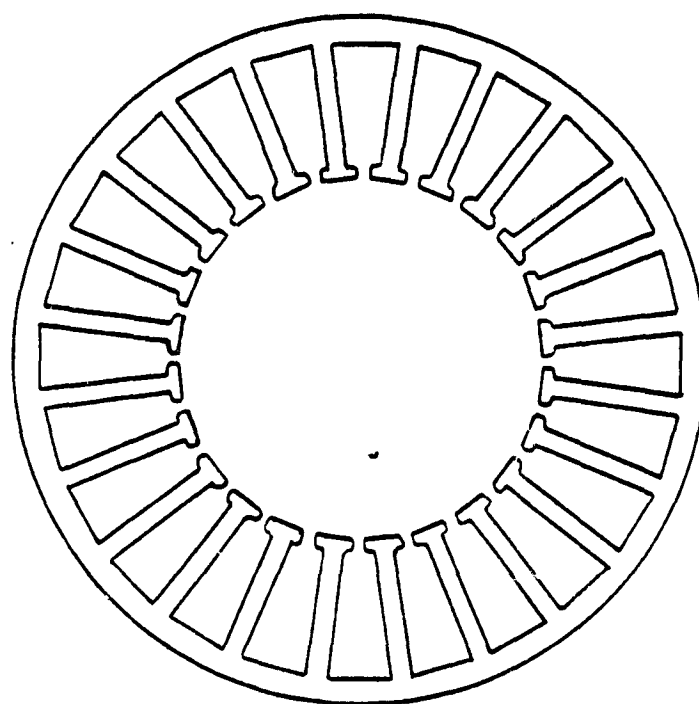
Stator Punching (Actual Size) for the EMA Motor
